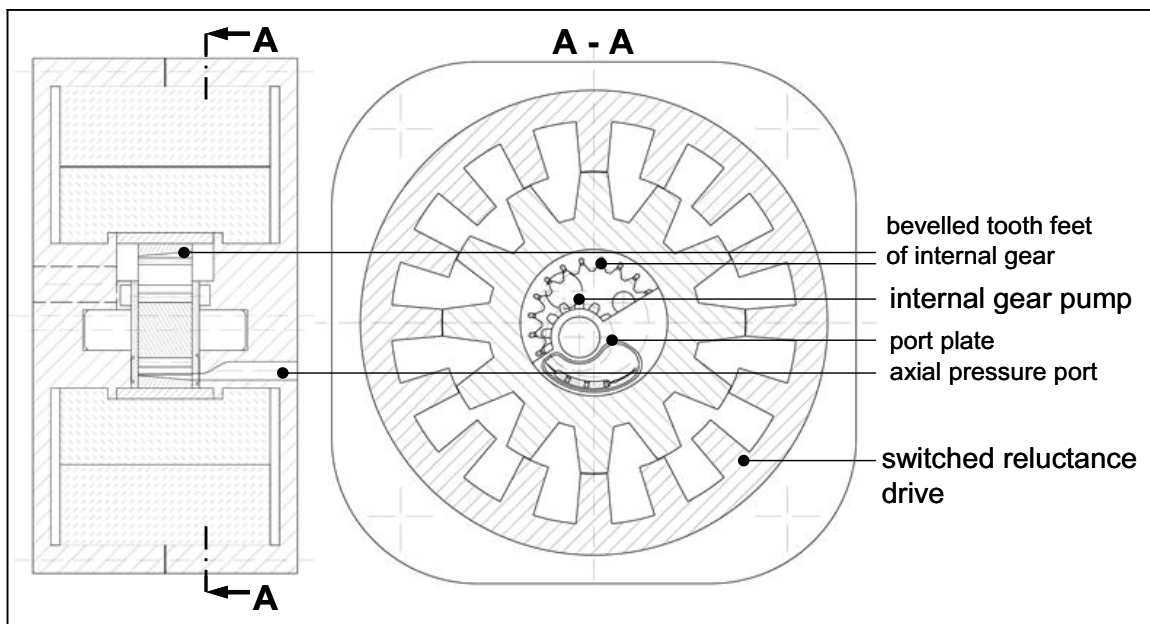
Design of a motor-pump unit based on a modified internal gear pump for high pressure range
